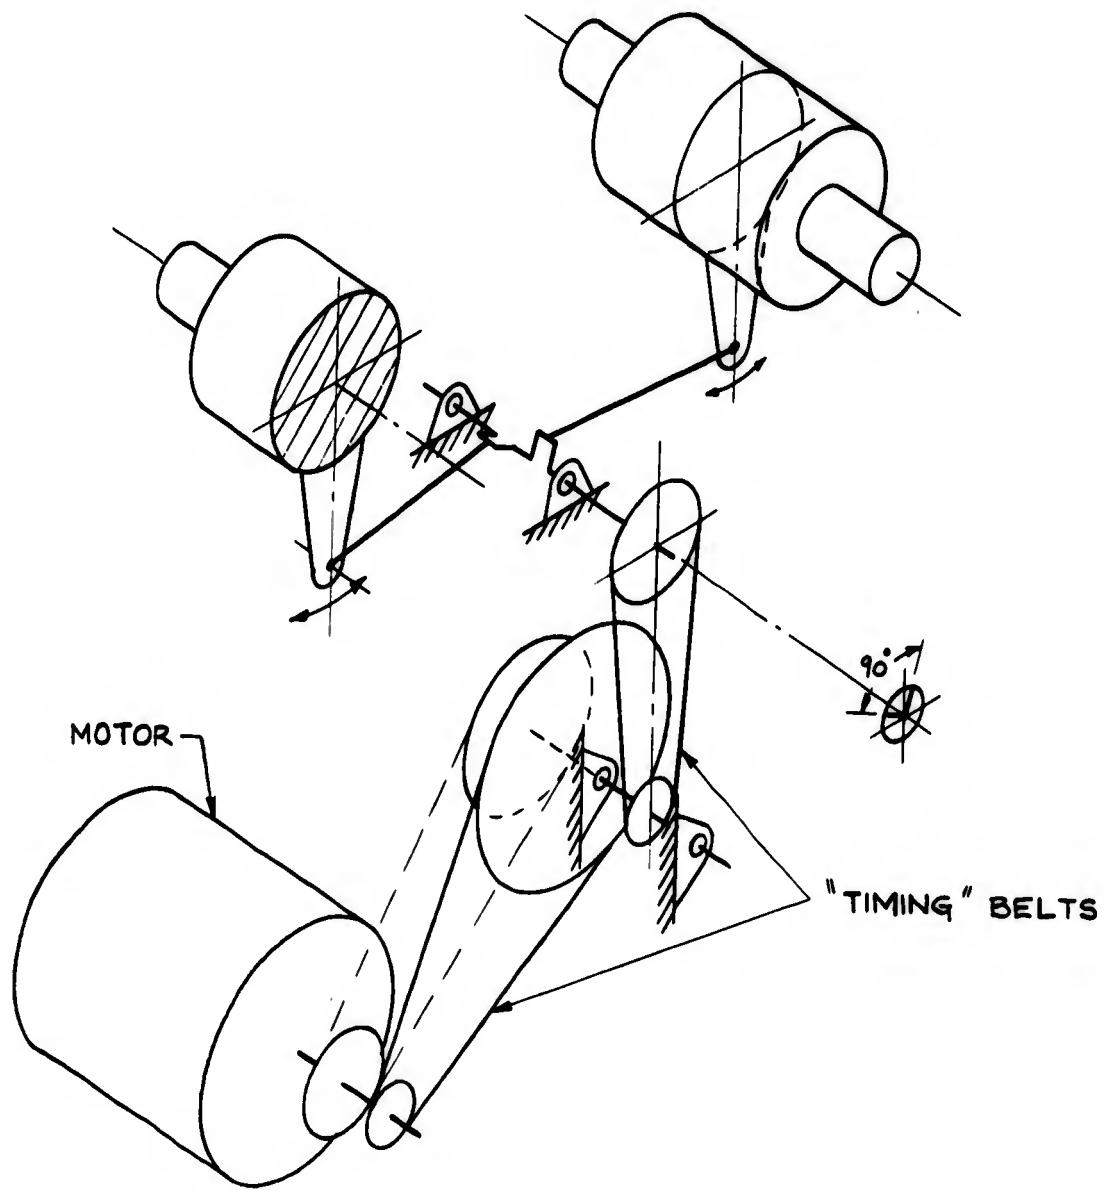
OSCILLATOR MECHANISM DRIVE
